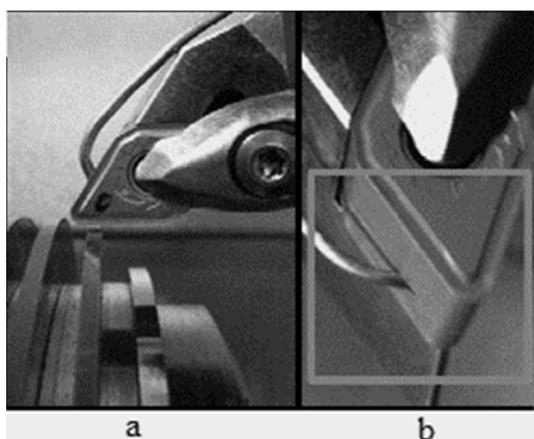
Experimental test equipment; (a) the orthogonal machining test, (b) embedded thermocouple for measuring the temperature
